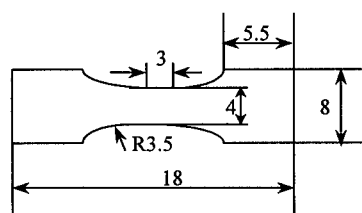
Dimension of in situ test specimens with thickness of 3 mm.
